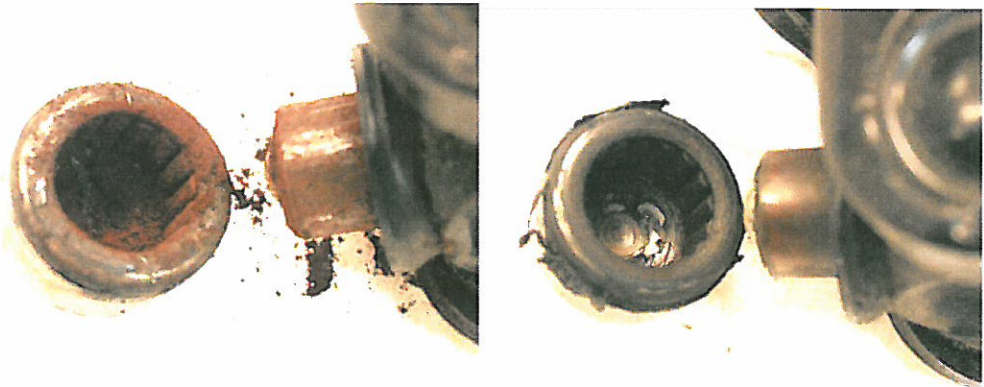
Corroded Bearing (Left) and a Normally Wearing Bearing (Right)
